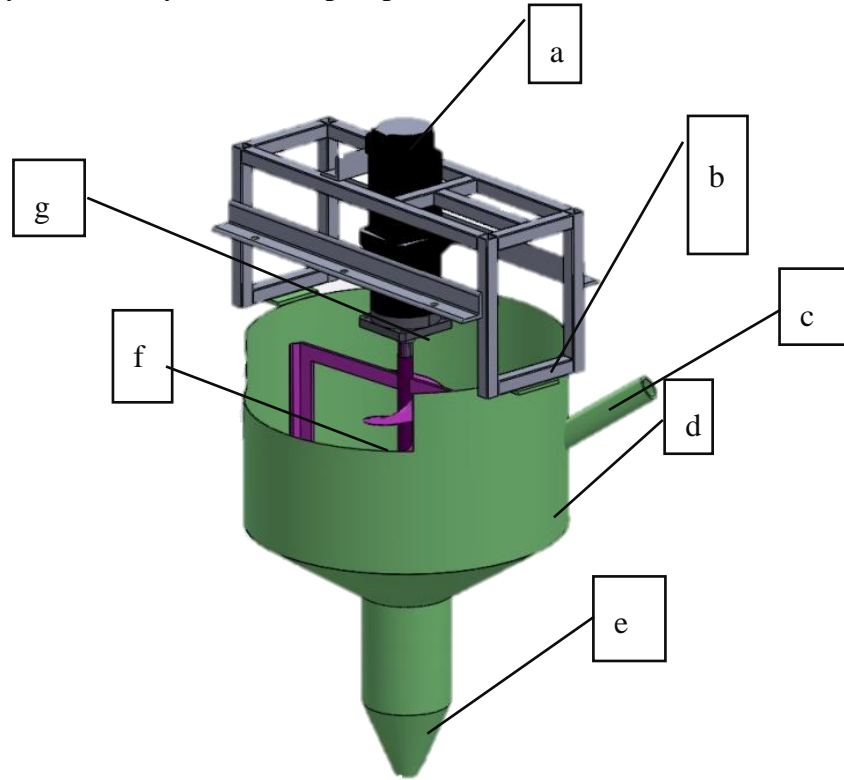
The extruder is designed to consist of the following parts: (a) Motor, (b) Frame, (c) Connection to ducts, (d) Material container, (e) Nozzle, (f) Screw, and (g) Reducer.
